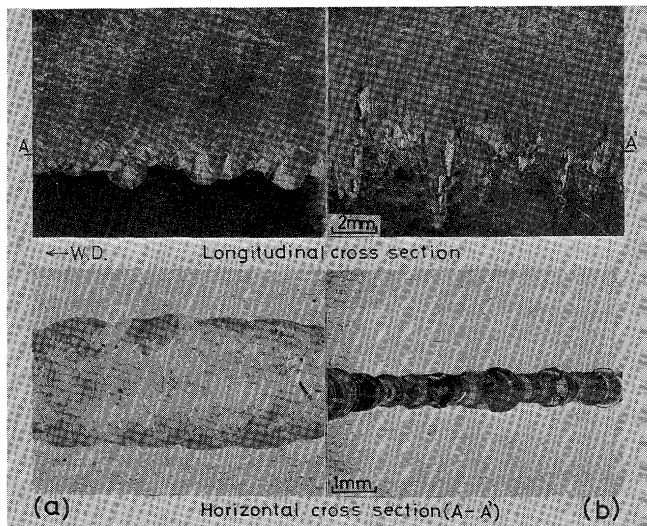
Macrostructures of longitudinal and horizontal cross section near the root of beam welds. (1200)
